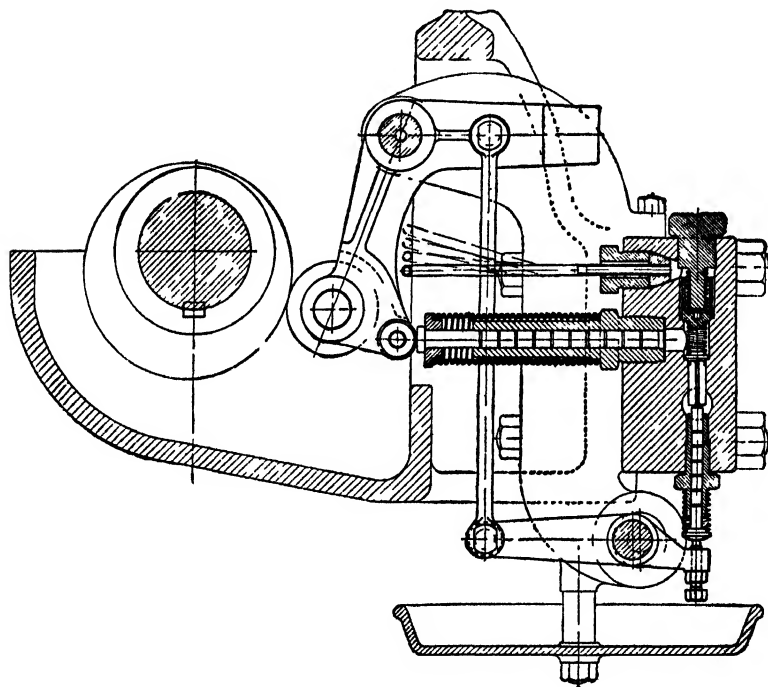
Section through pump of 17 by 25-in., Worthington, air-injection, Diesel.
